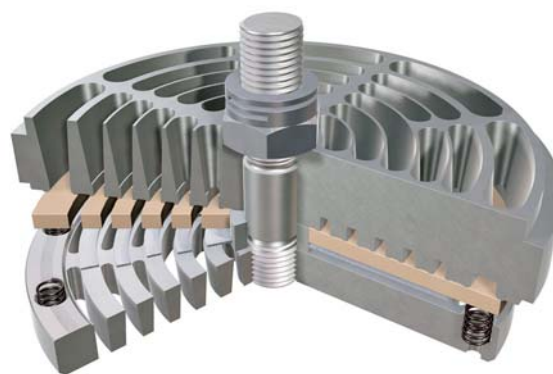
High-tech valve with parts made out of PPS / carbon fibre via injection compression moulding¹³
